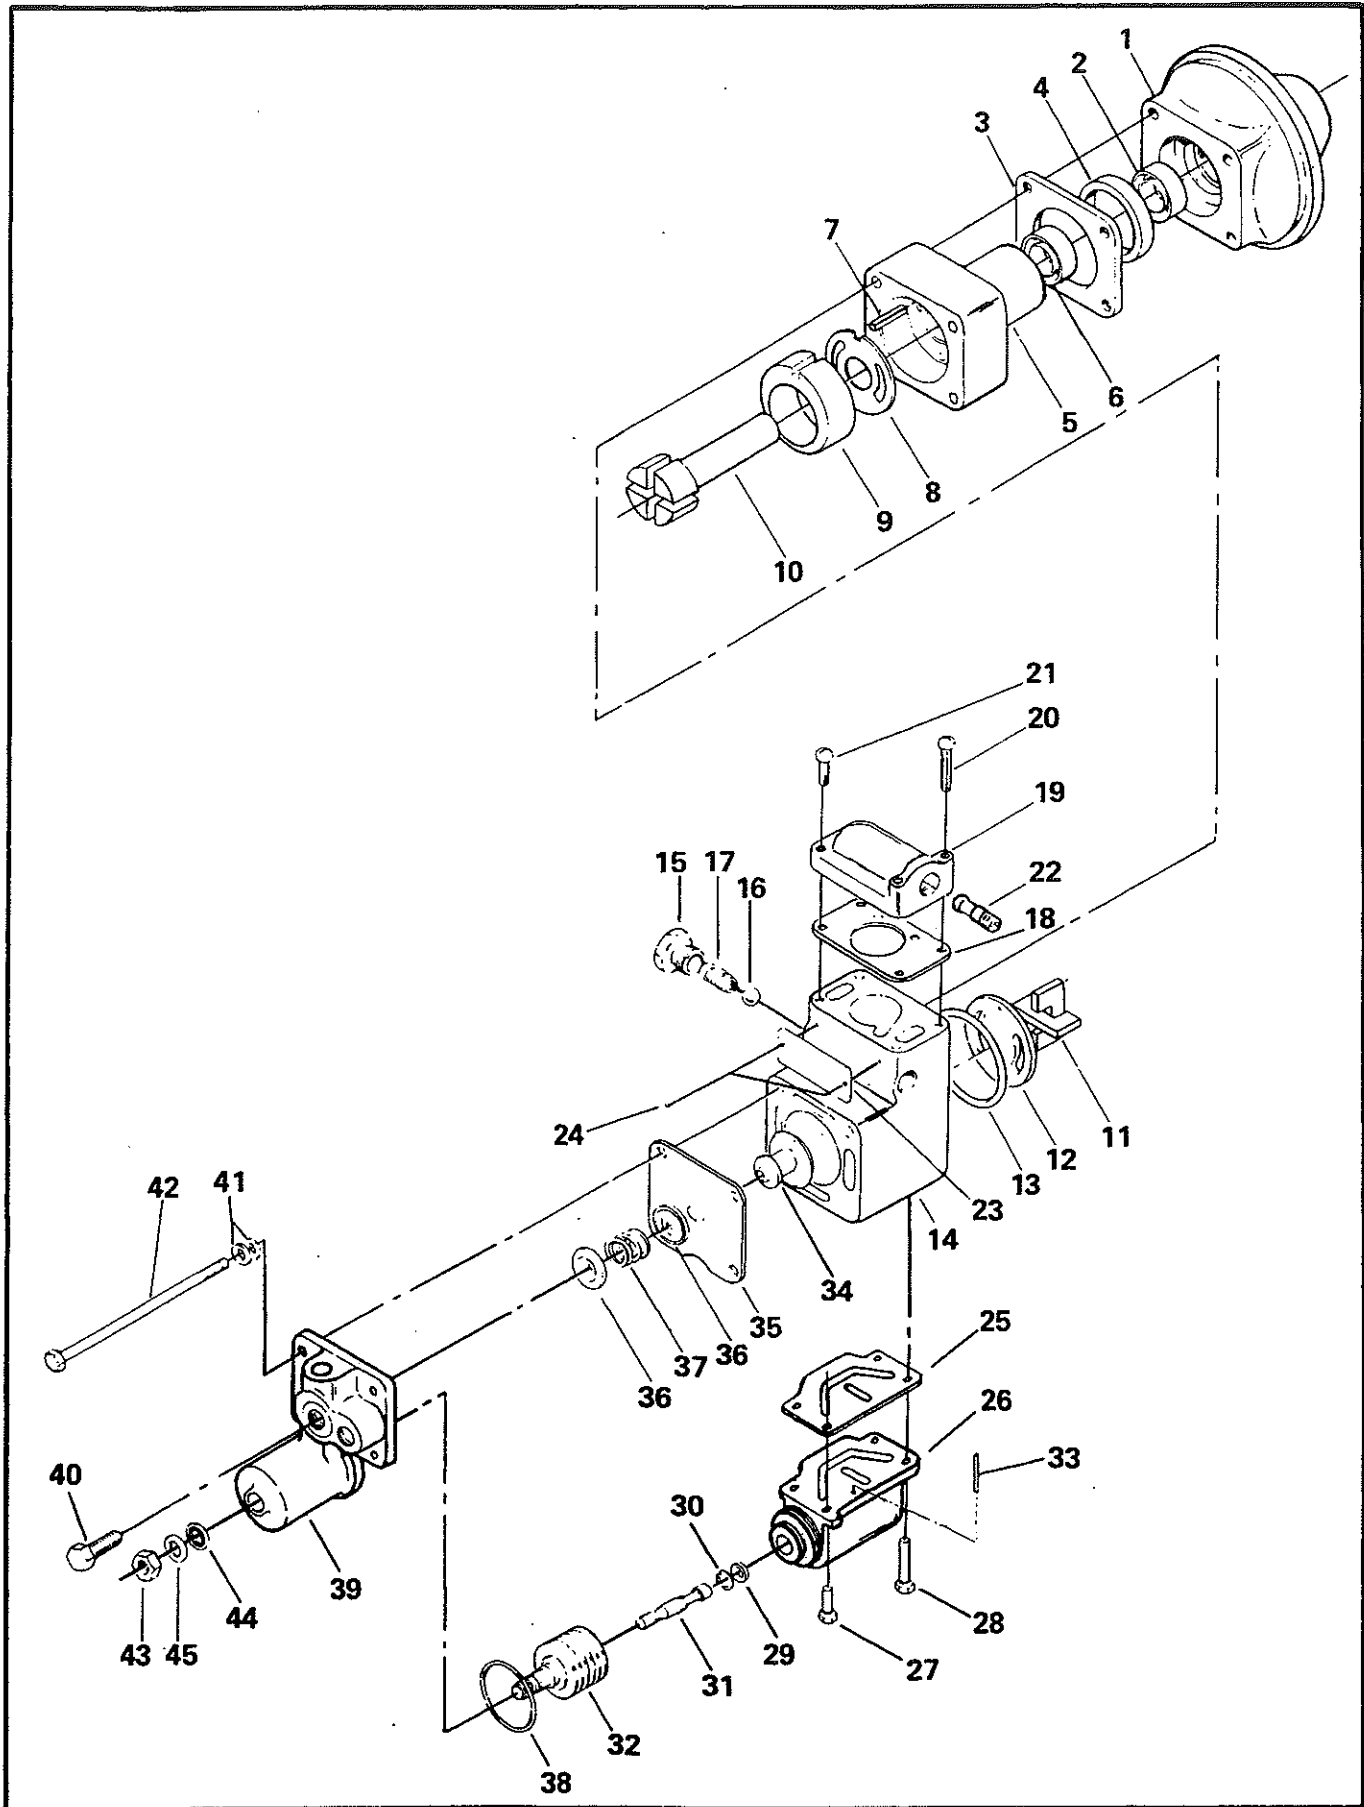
FUEL PUMP ASSEMBLY.
